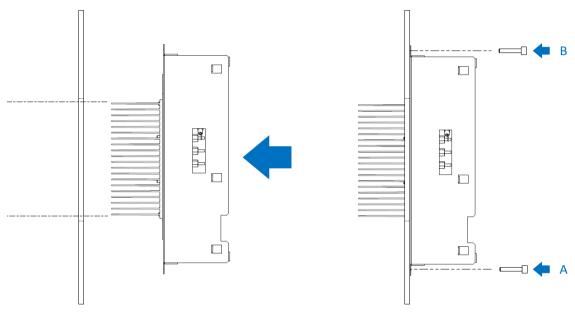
Mechanical Mounting of PIU Recessed Mount
